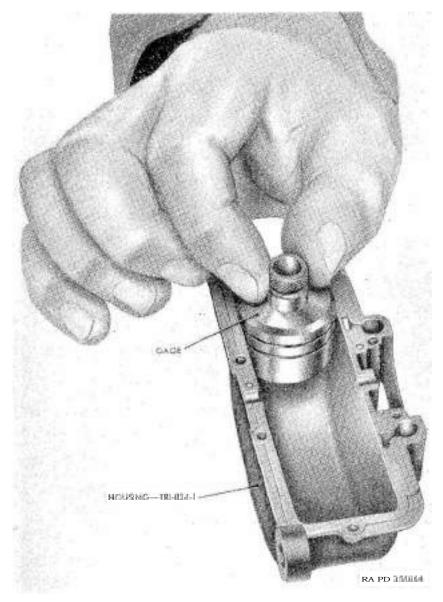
Checking housing with "go—no go" gage from kit — 41—K-280.
